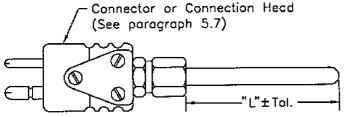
Sheathed Thermocouple Assembly with Connector or Connection Head (Any Type Specified)
